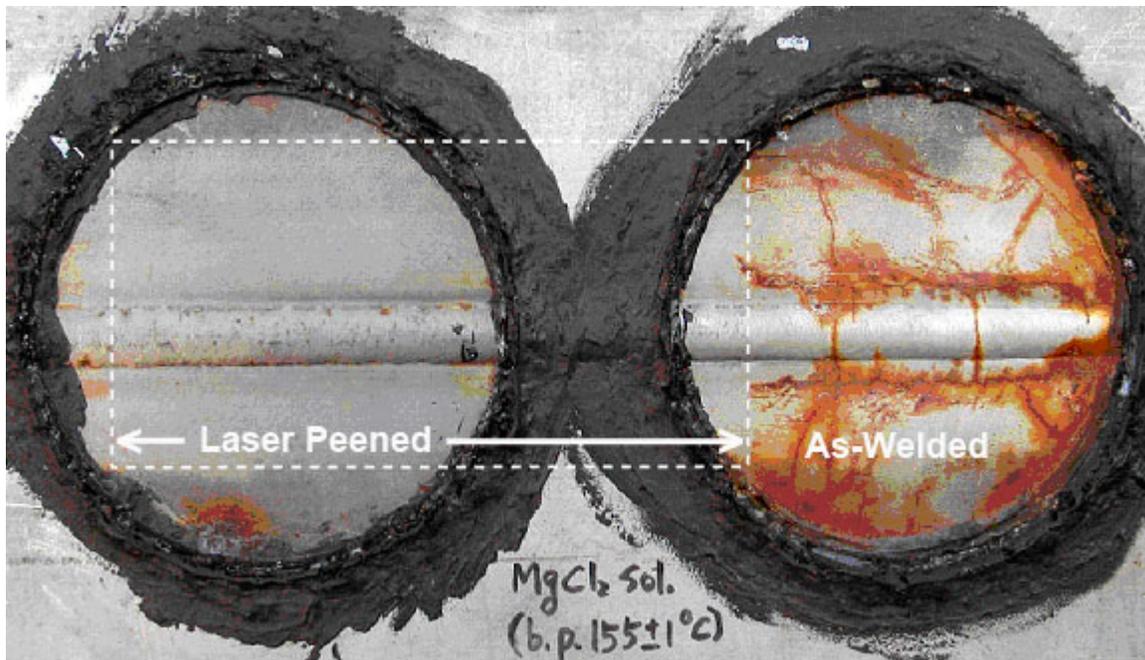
One inch thick plates of 316 stainless steel were seam welded and then exposed to magnesium chloride at 155 °C to accelerate corrosion cracking. Dotted rectangle shows the laser peened region. In the non-laser peened region, transverse cracks appear across the weld and longitudinal cracks travel along the head affected zone but arrest when they reach the laser peened area. In contrast, the laser peened region shows no cracks and essentially no corrosion.
